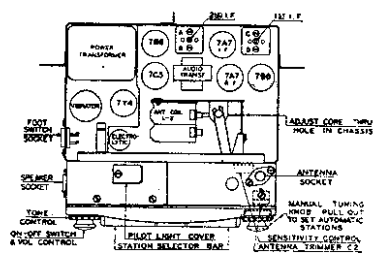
Top view of Chassis 6D80, 6D80E, 6D90, and 6D90E.
